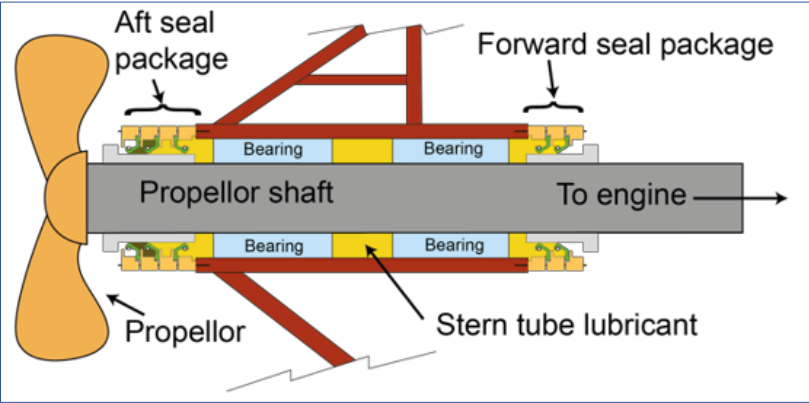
Concept of a ships propeller shaft rotating carried within the stern tube with rubber seals installed. Courtesy of Ref. [4]. Not on scale.
